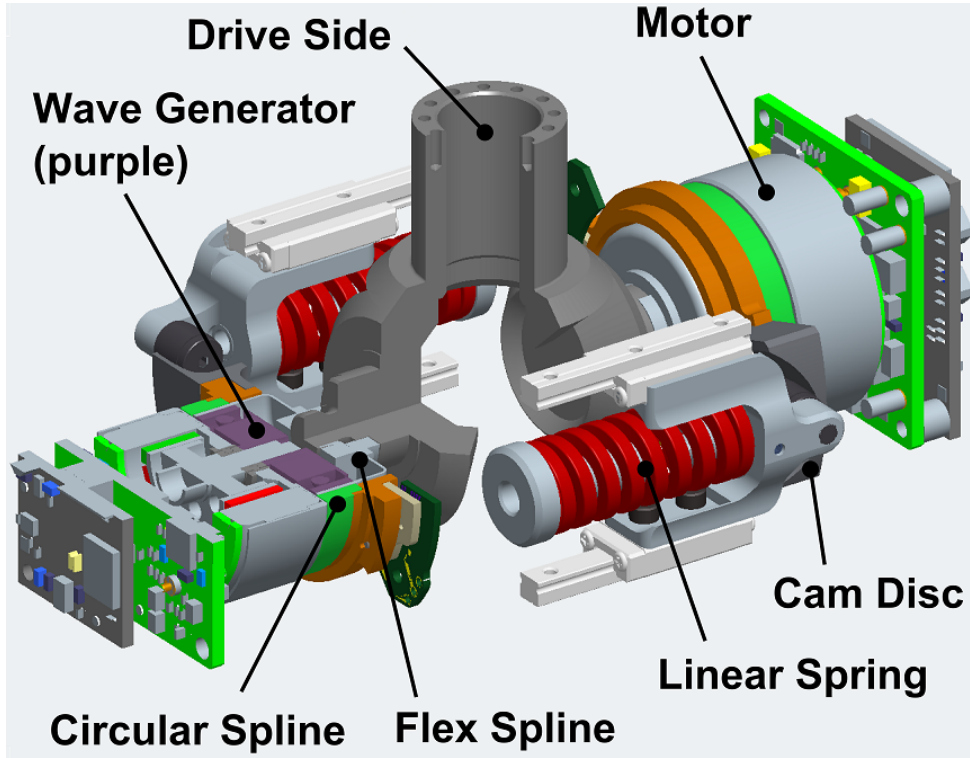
A CAD drawing of the BAVS joint as it is implemented in the forearm rotation of the DLR Hand Arm System with asymmetric cam disc shape and double spring solution. The mechanism dimensions are 95 mm by 56 mm by 45 mm.
